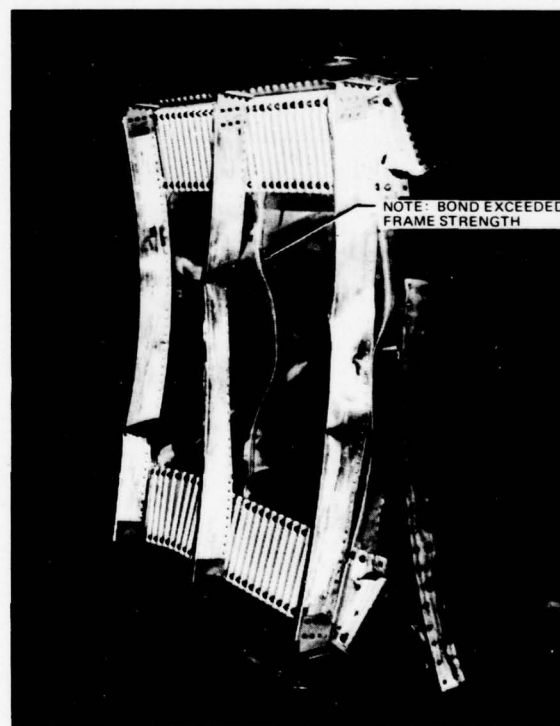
SHEAR AND TENSION FAILURE - BACK VIEW
